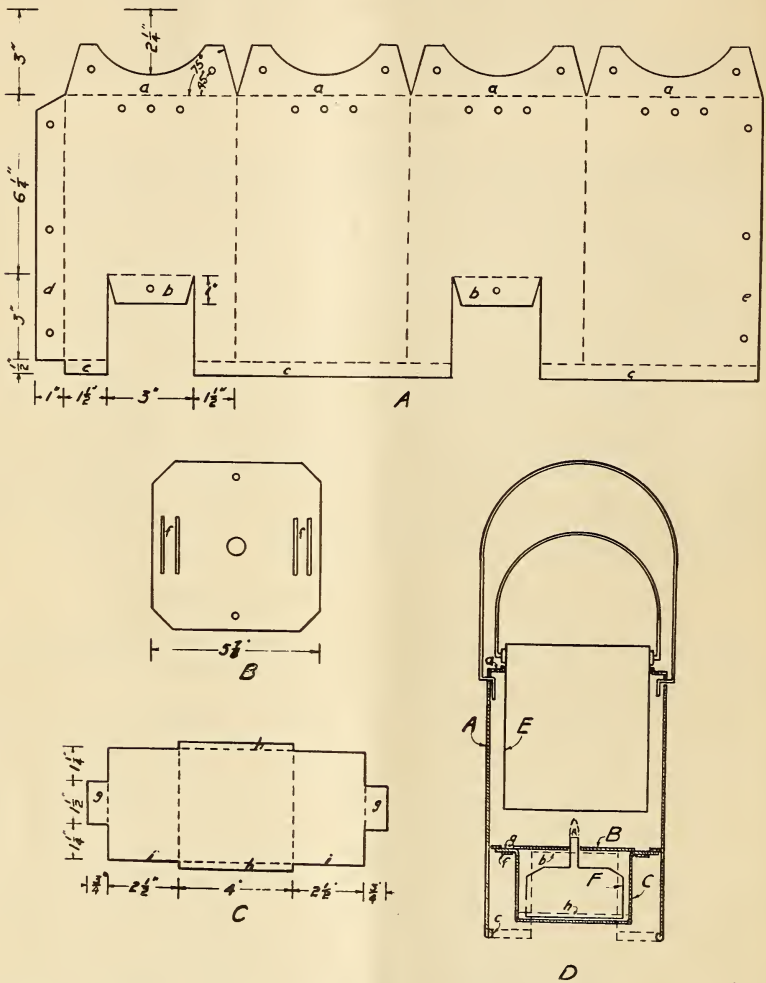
Details of the construction of a grafting-wax melter. *A*, Plan for the larger pail, or body of the melter; *B*, plan for the false bottom; *C*, plan for the burner support; *D*, sectional view of the assembled burner; *E*, pail for holding the wax; *F*, alcohol burner. Lower-case letters designate parts for convenient reference in the text; like letters designate like parts.
